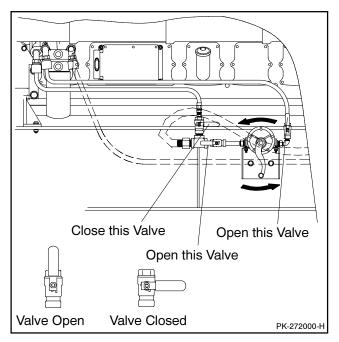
Hand Prime Pump with Valve Positions for Fuel Priming (Generator Set Without a Fuel/Water Separator Shown)
